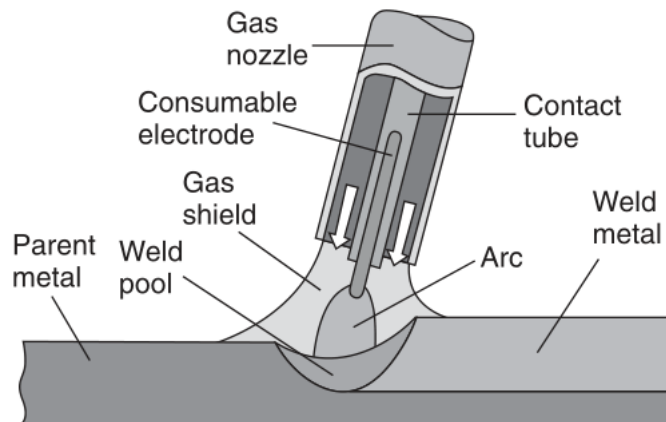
Figure illustrating the principles of the gas metal arc welding (GMAW) technique [16].
